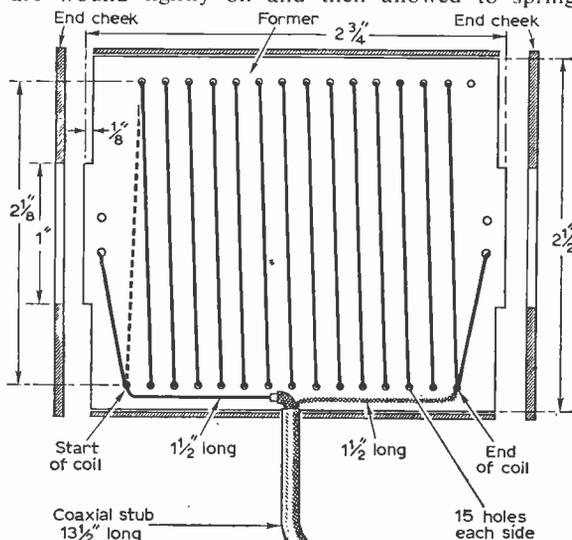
Drilling dimensions and constructional details of the loading coils.
